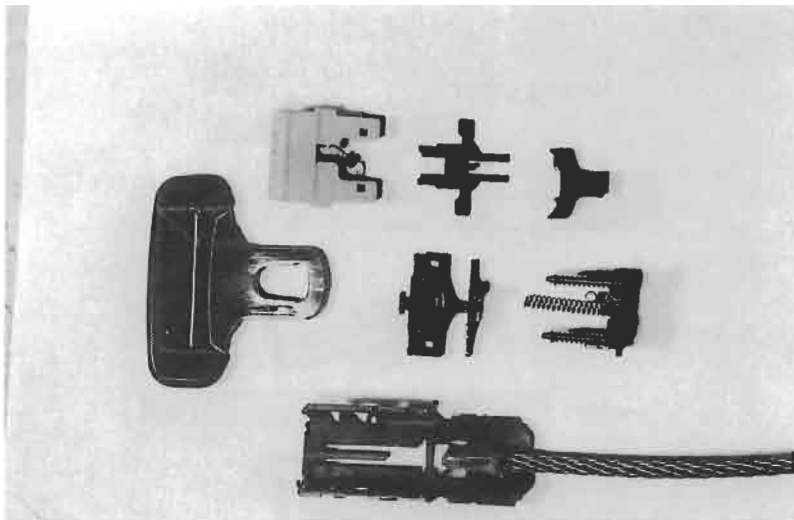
Disassembled components of seat belt. Top row: release button, locking slider, and slider. Middle row: clasp, latch, spring subassembly. Bottom row: housing and cable.
